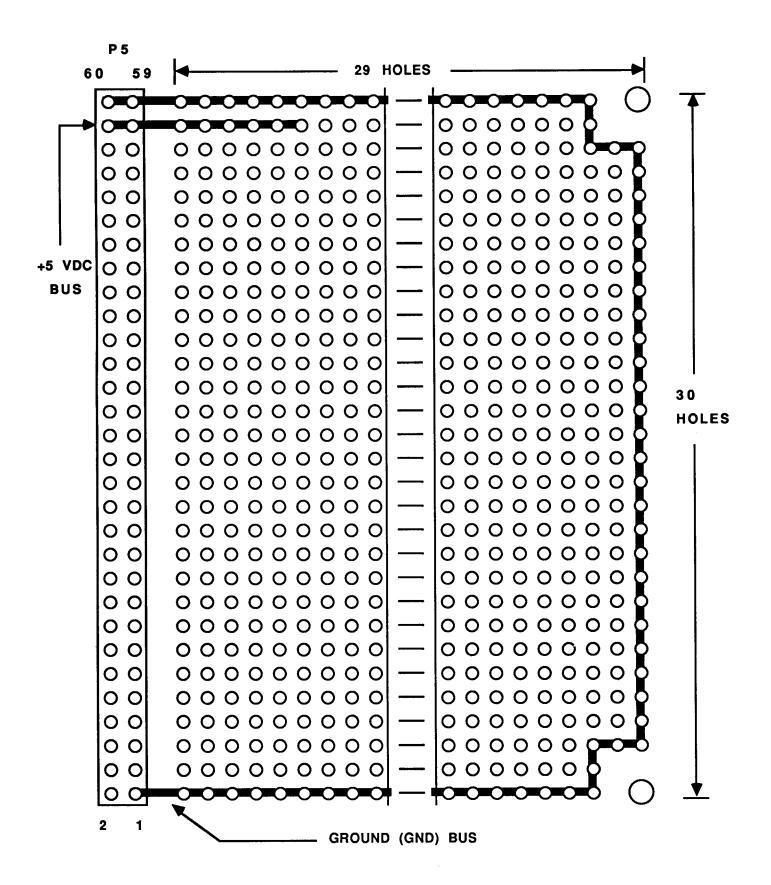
Wire-Wrap Area (Top Exploded View)
